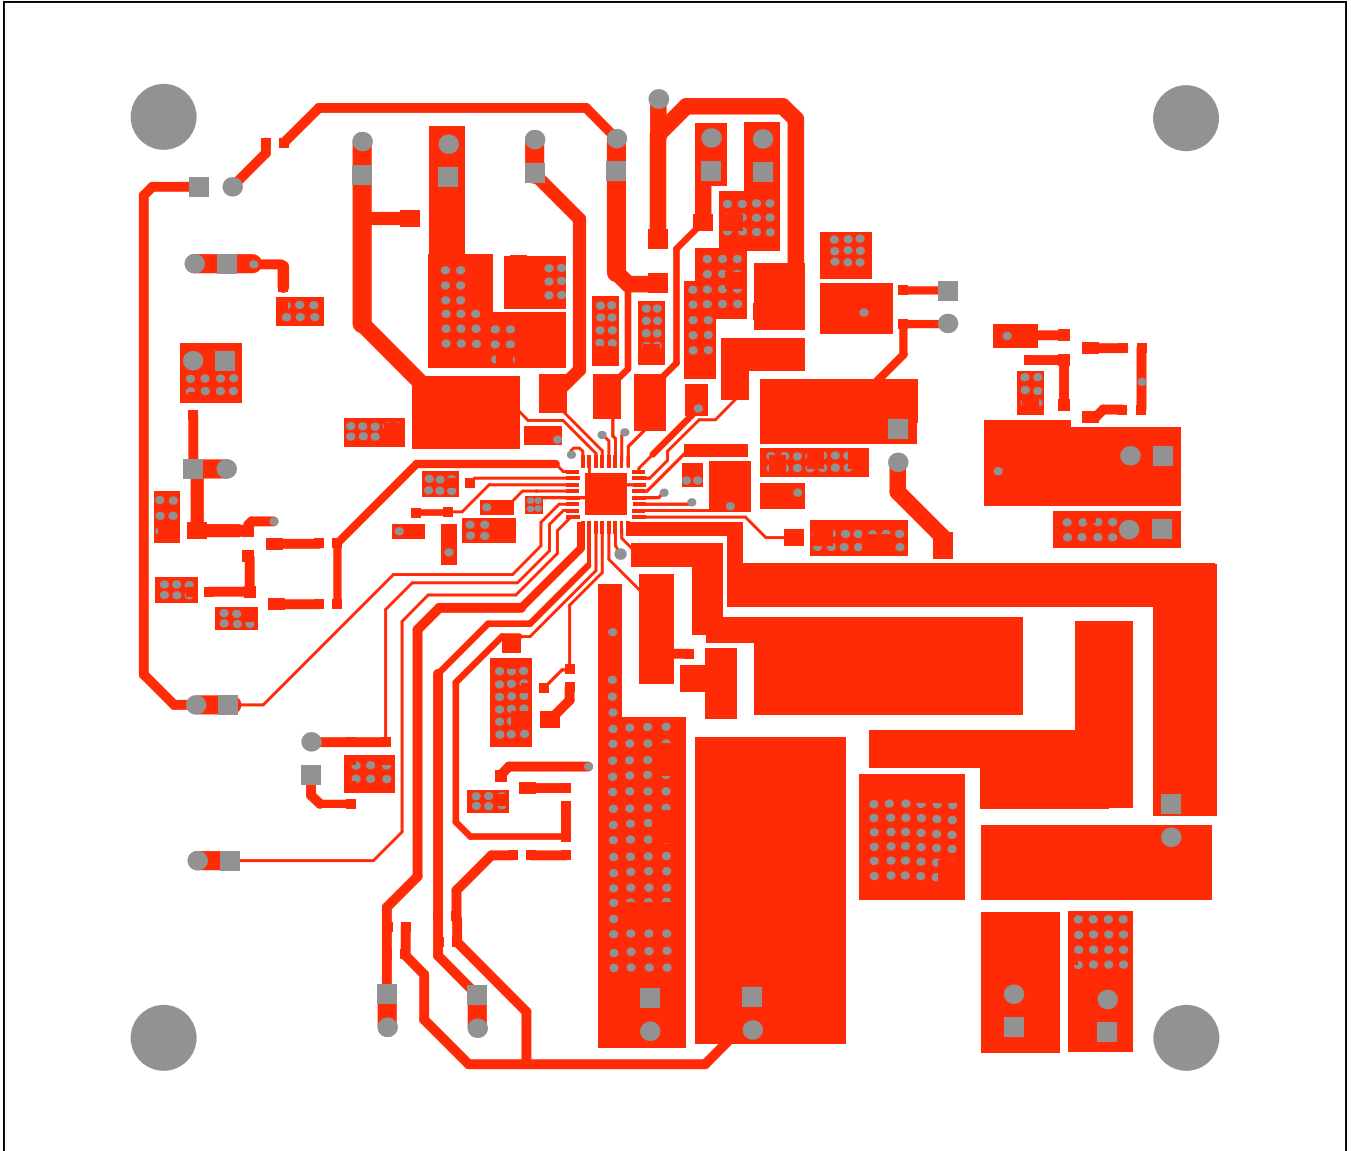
MAX20070 EV Kit PCB Layout—Component Side
